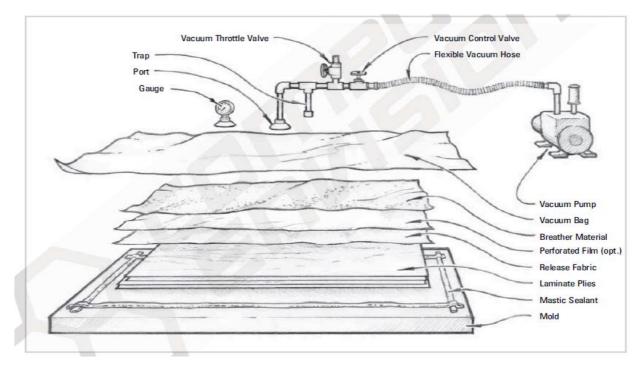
ILLUSTRATION OF VACUUM BAGGING TECHNIQUE
